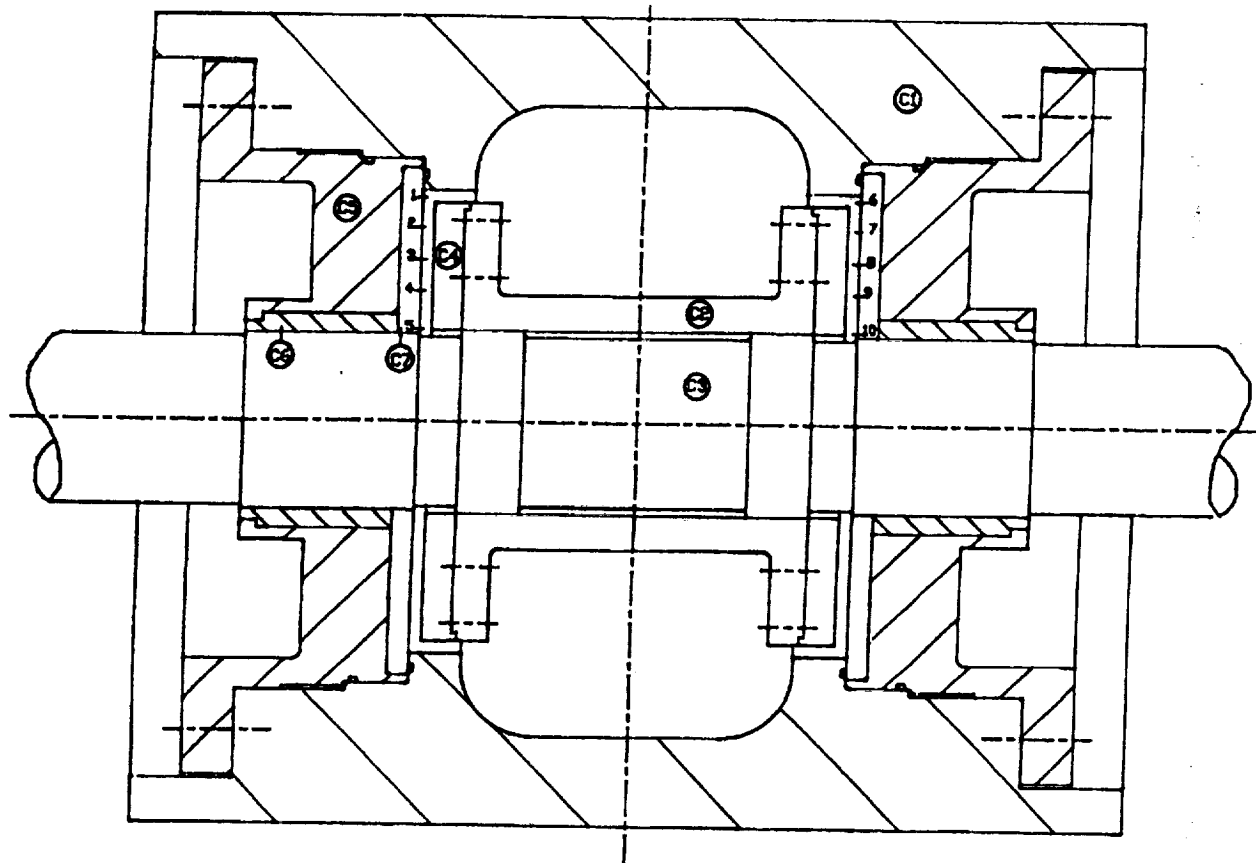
Test rig layout; instrumentation and hydraulic shakers not shown
